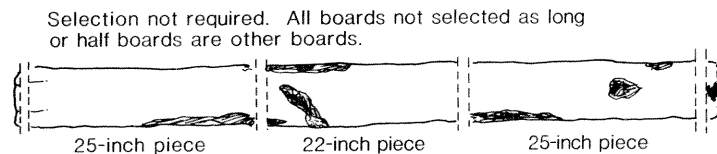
Gang crosscutting (pictured is GCL 6A1 on 4-inch by 6-foot boards).
